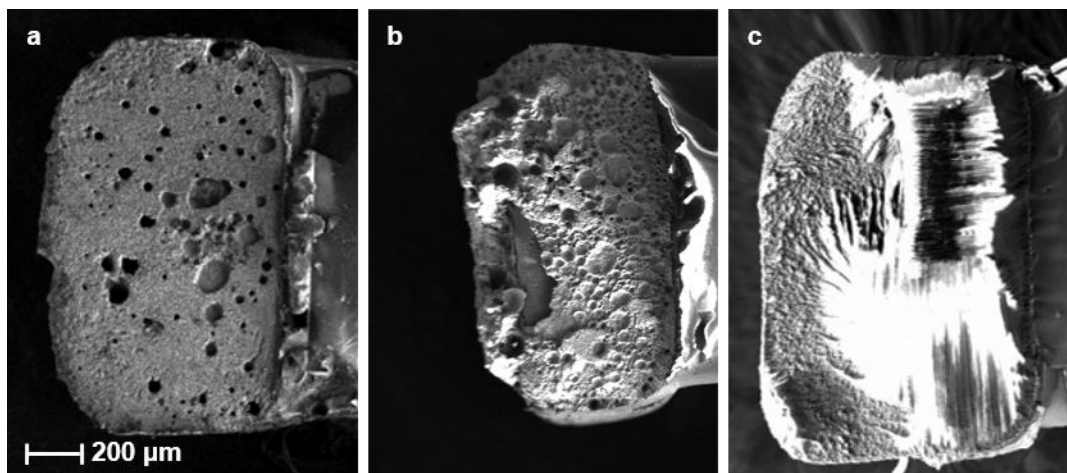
(a–c) Typical fracture surface of the tested SMD non-aged sample (IMC/solder, solder, pad fracture).
